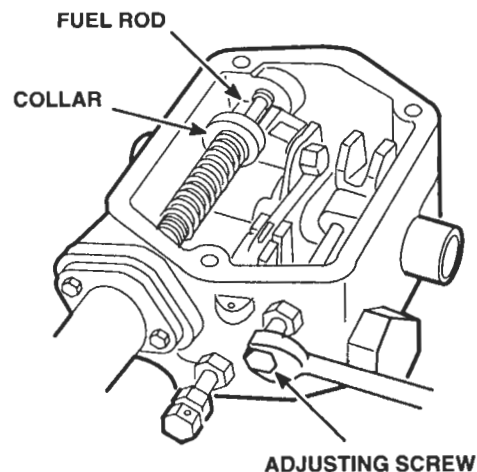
Setting Maximum Fuel Adjusting Screw (Load Limit)
